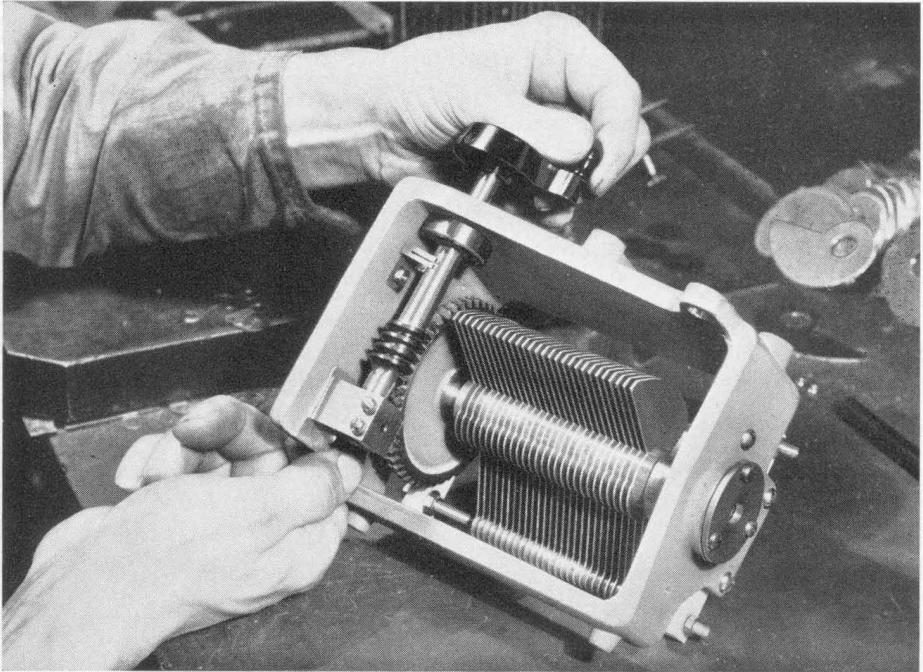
Inspecting the assembled condenser for accurate alignment of plates and smooth action of worm drive
